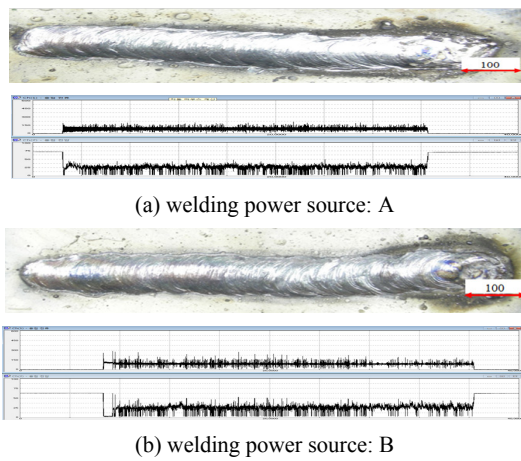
Welding bead and waveform domestic welding power source at 90A
